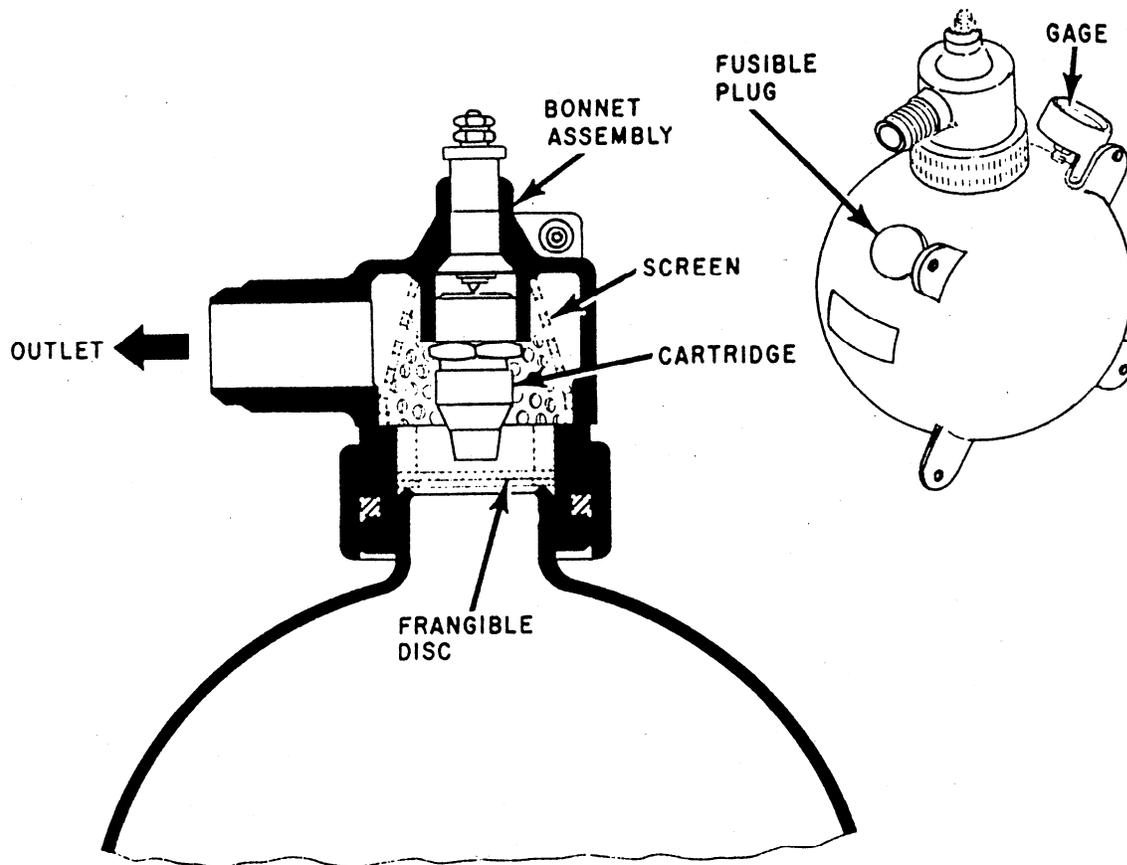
CF<sub>3</sub>Br container assembly.
